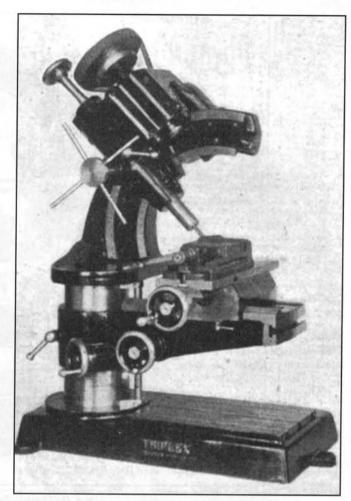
The Combination Tool arranged for Angular Milling and Drilling.
